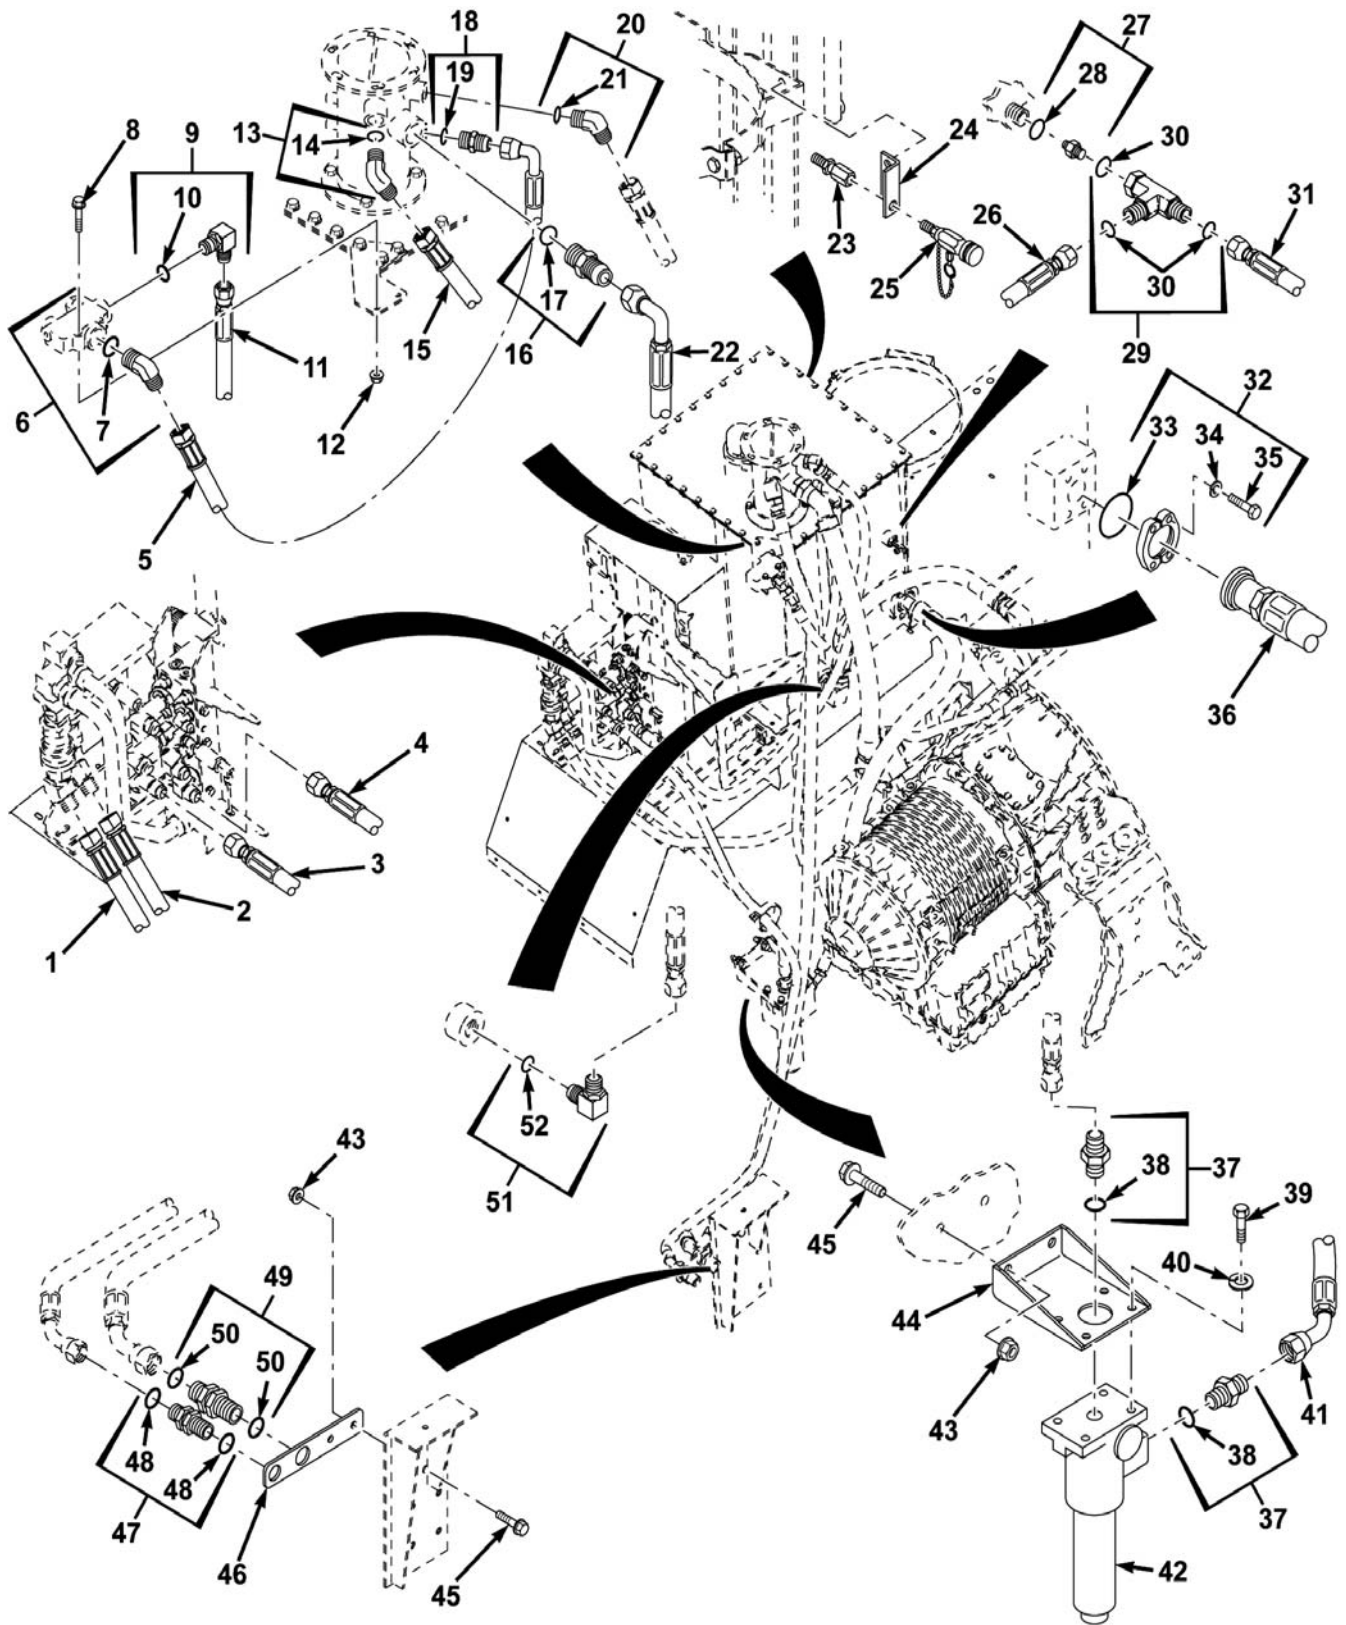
82 L MAIN HYDRAULIC (SHEET 1 OF 2)
